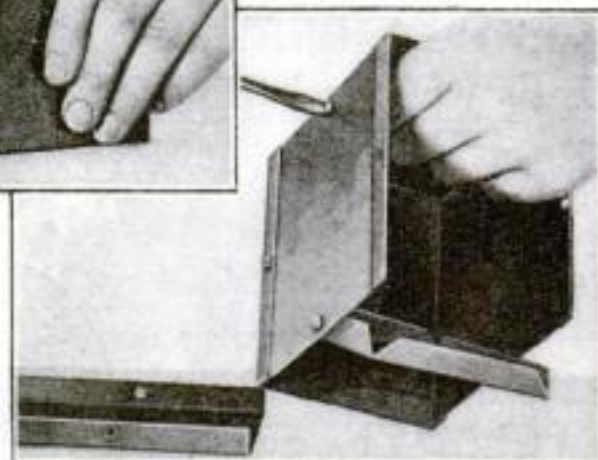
Putting the top in. Note how the bottom is pivoted on two bolts
